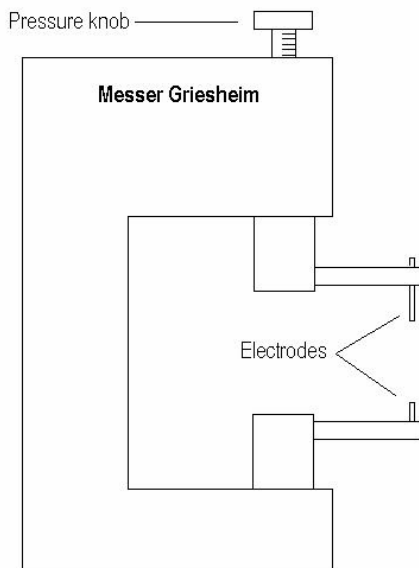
Schematic representation of the point welding machine of the TFE workshop, with spring pressure knob indicated.
